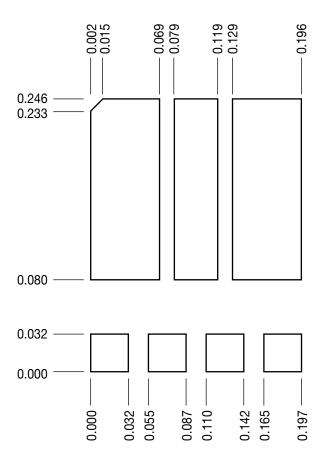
Recommended PCB Solder Pad Configuration (Top View)
